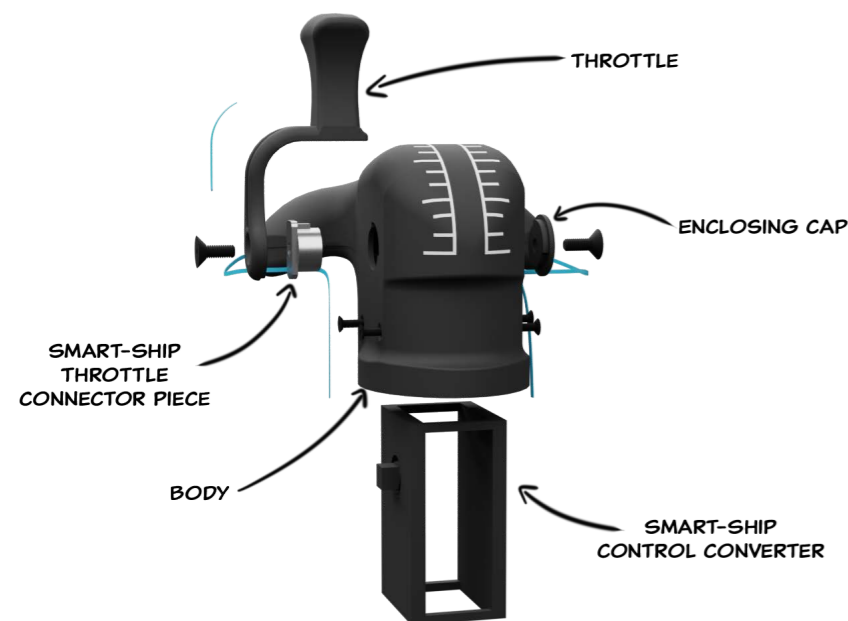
Exploded view of the final concept (with Smart-Ship parts)
